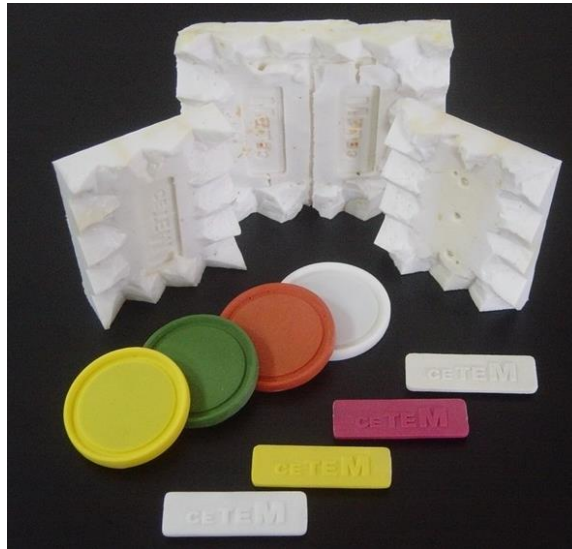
Silicone mould and pieces created by rapid prototyping techniques. Source: CETEM.
